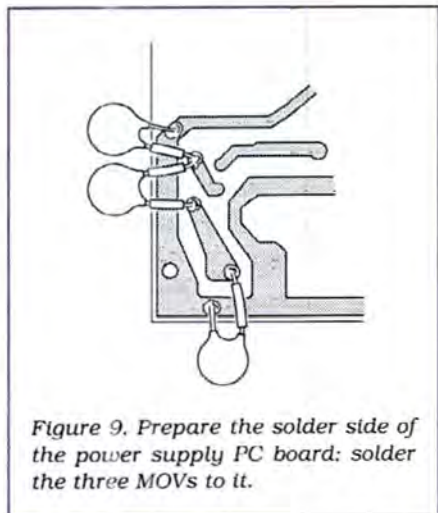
Prepare the solder side of the power supply PC board: solder the three MOVs to it.
